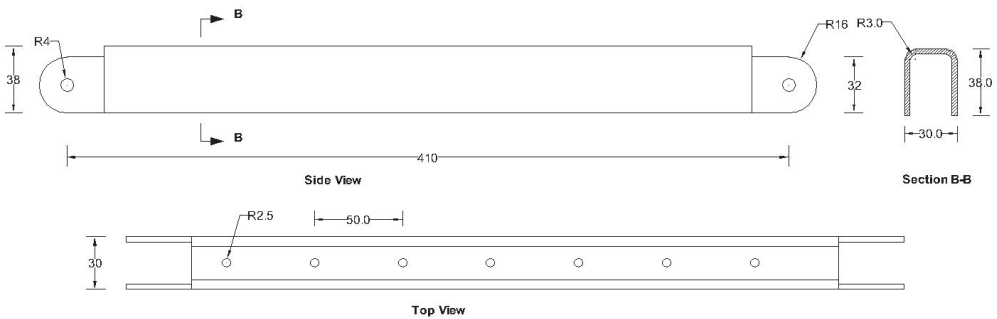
Details of Secondary bars (all dimensions are in mm, steel plate gauge 11).
